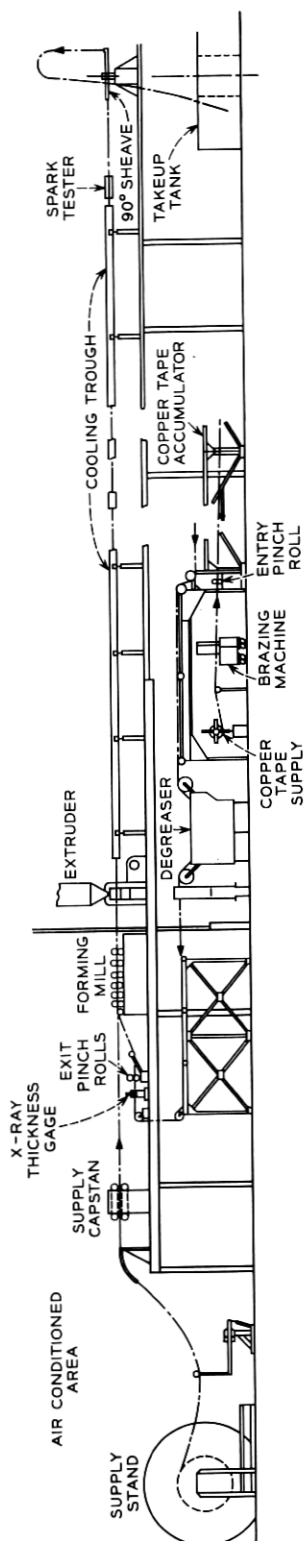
Elevation of outer conductor forming and jacketing line.
